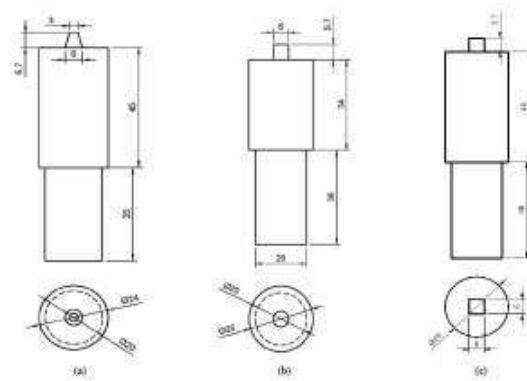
Different tool profiles used (a) tapered cylindrical (b) straight cylindrical (c) straight square [6]
